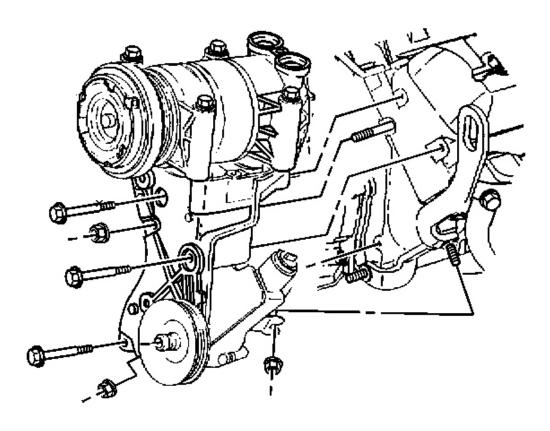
View Of Power Steering Pump Bracket Courtesy of GENERAL MOTORS CORP.
